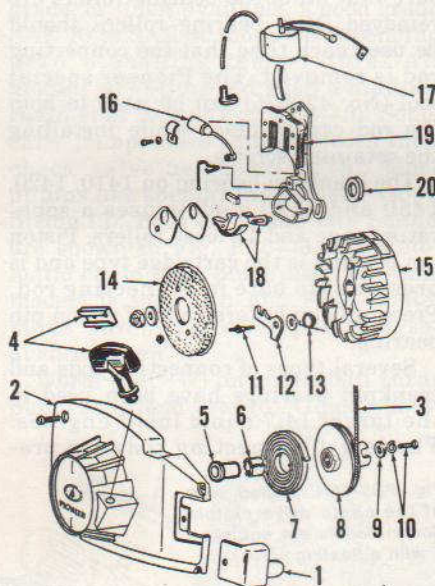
Exploded view of the rewind starter. Some models may not be equipped with steel bushing (5).
